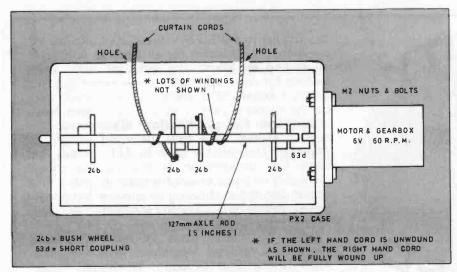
The motor drive-shaft assembly and housing. The motor is bolted outside the case and the motor spindle linked to the winding shaft using Mecanno parts.
